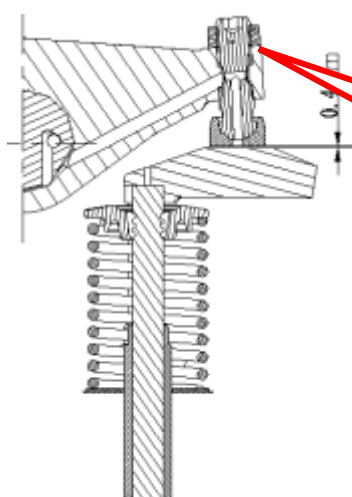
Clearances of intake valves under cold status - 0.4mm
